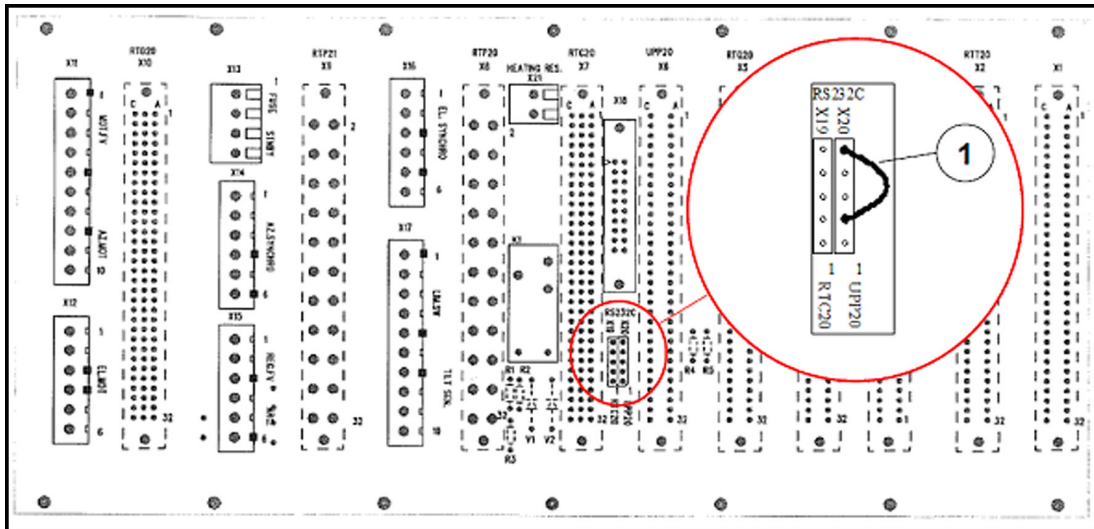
Connecting Jumper Wire 1 in the Motherboard
